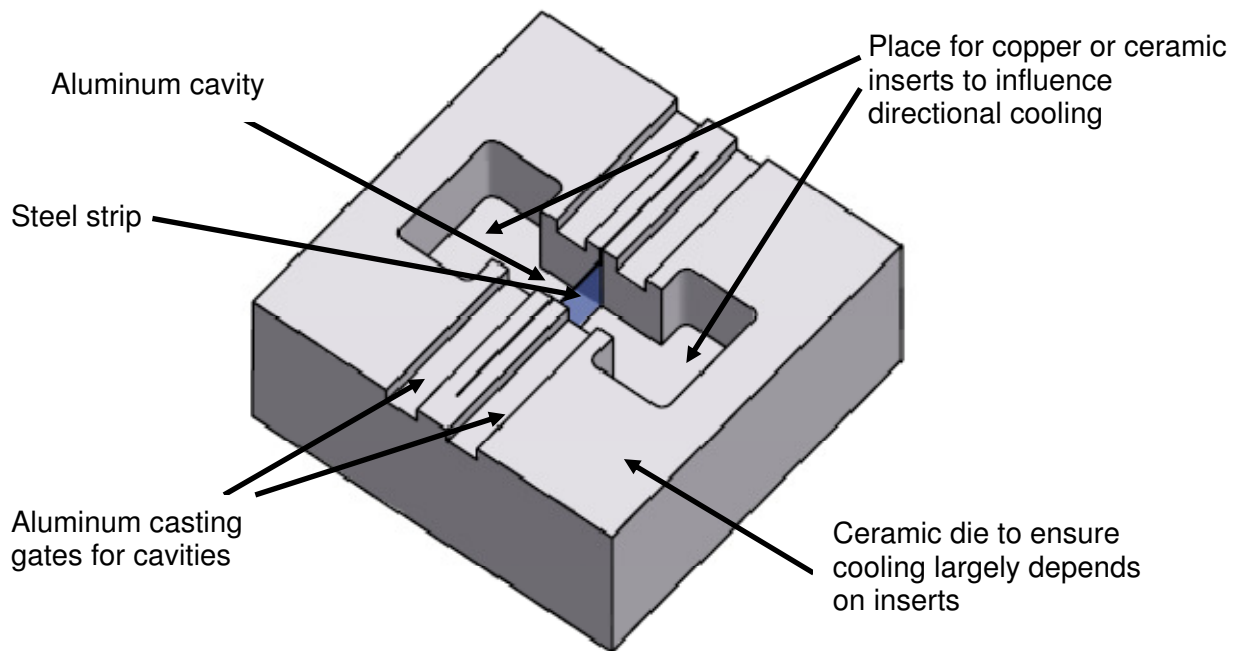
Assembly for evaluating interface strength in cast compound structures with tensile test specimen
